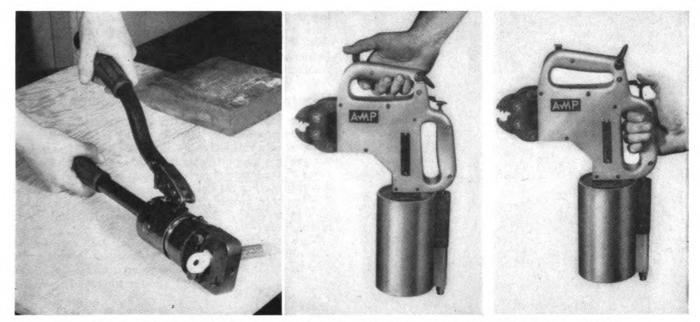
(left) Hand hydraulic tool. Fig. 8—(center and right) Pneumatic hand tool with double contact
